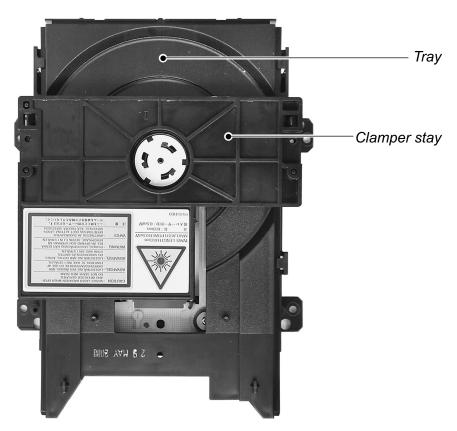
Mechanism chassis assembly (Top side)
